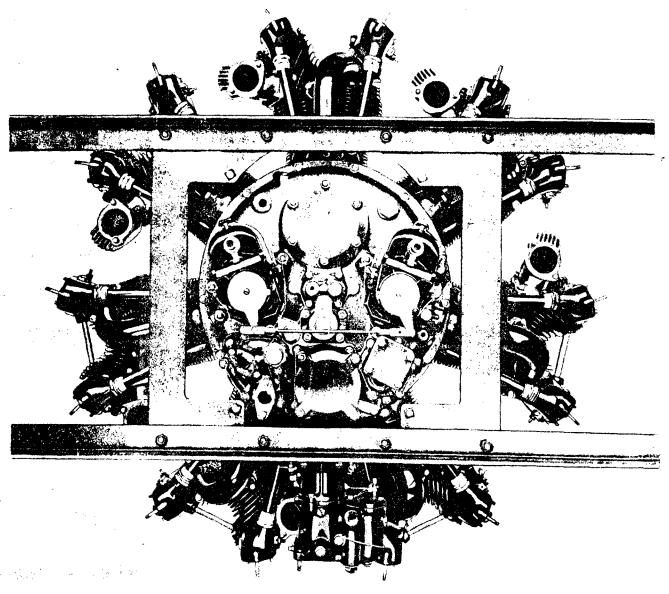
Rear View of Engine Mounted in Preparation for Disassembly
